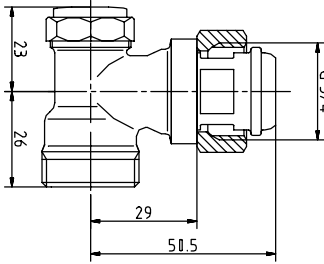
Angle with 3/4" external to 3/4" internal thread
